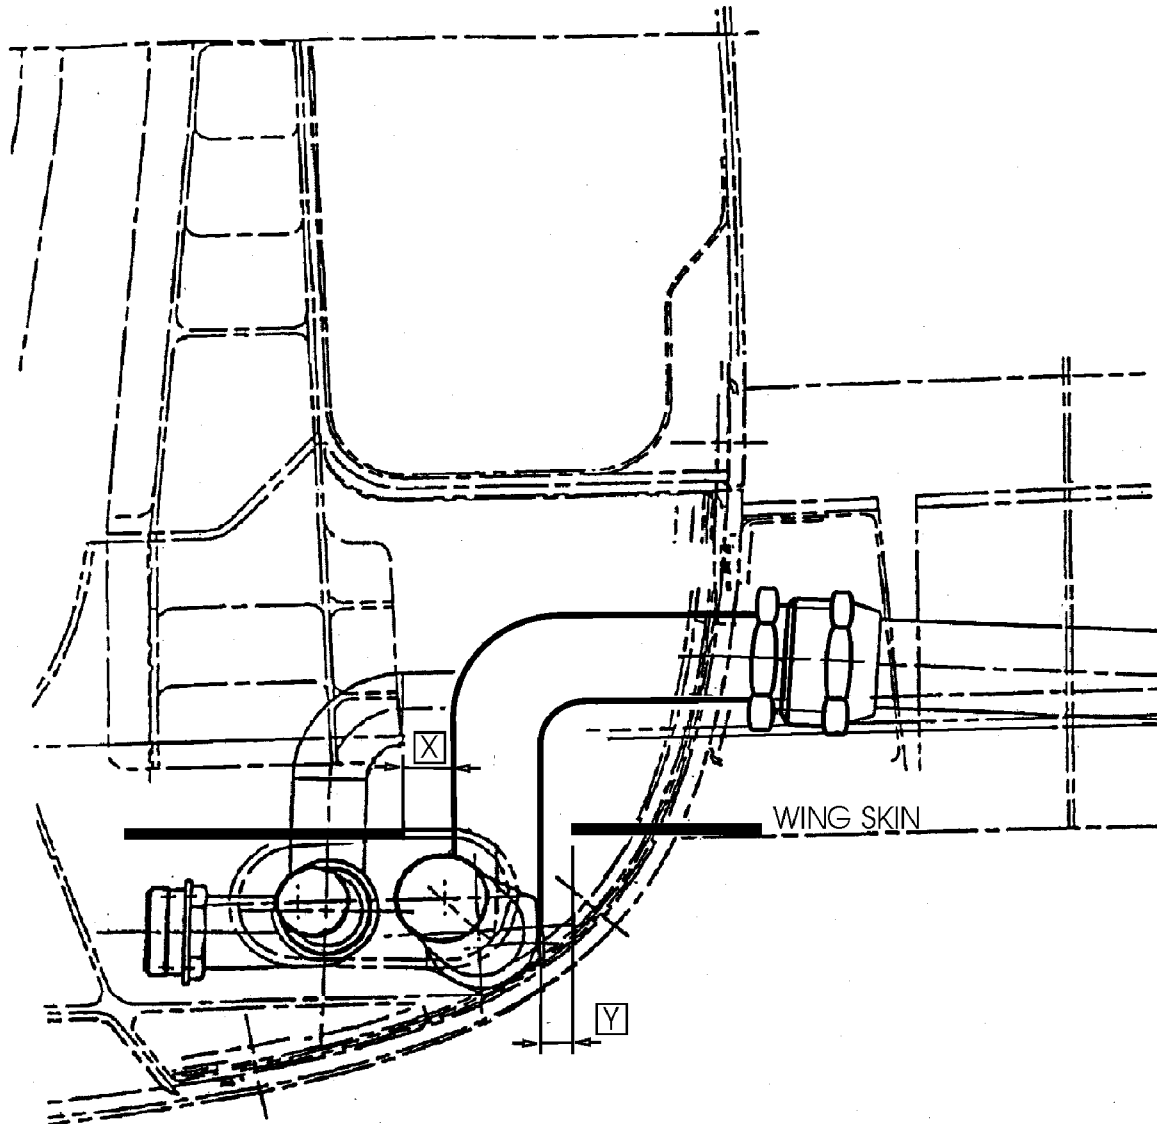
Bleed Air Ducts - Removal/Installation (Sheet 3 of 3)
